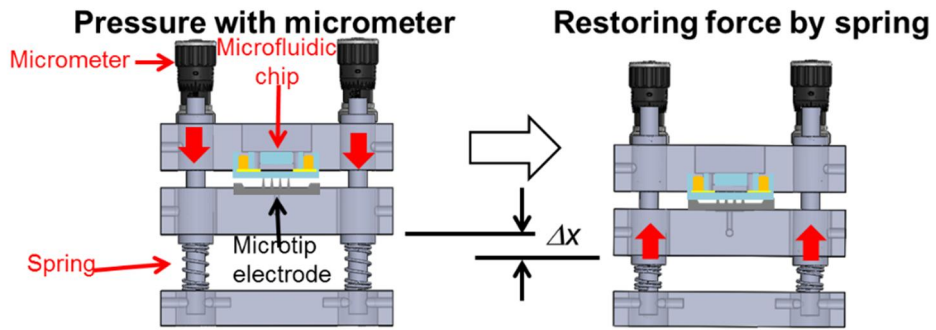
The acryl jig consists of three acryl plates, micrometers and springs
